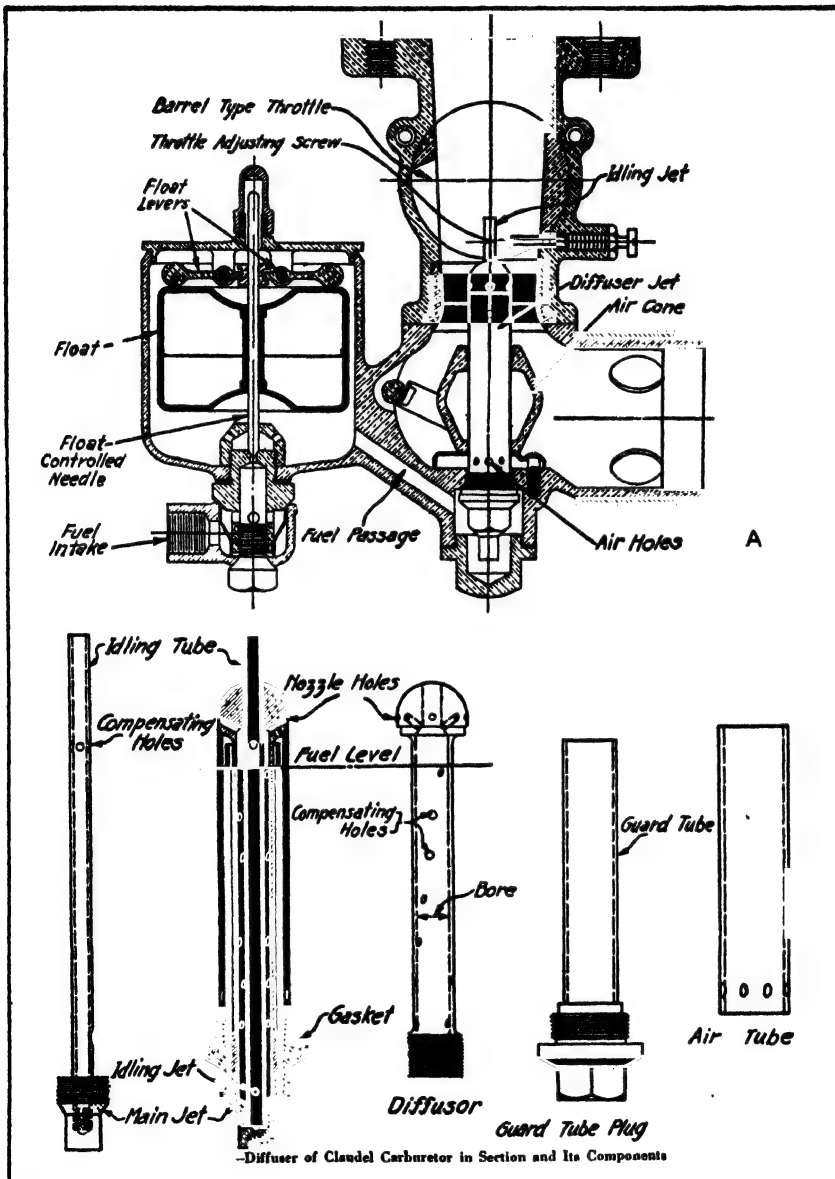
Sectional View of Claudel Aviation Type Carburetor Shows Arrangement of Internal Parts at A. The Diffuser of the Claudel Carburetor at B is Dismantled to Show its Components.
